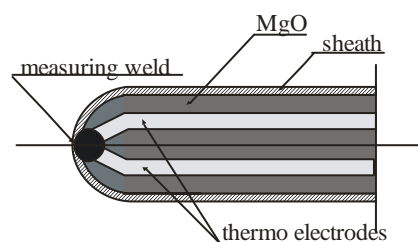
Longitudinal section of the final part of the sheathed thermocouple with the weld welded to the sheath
